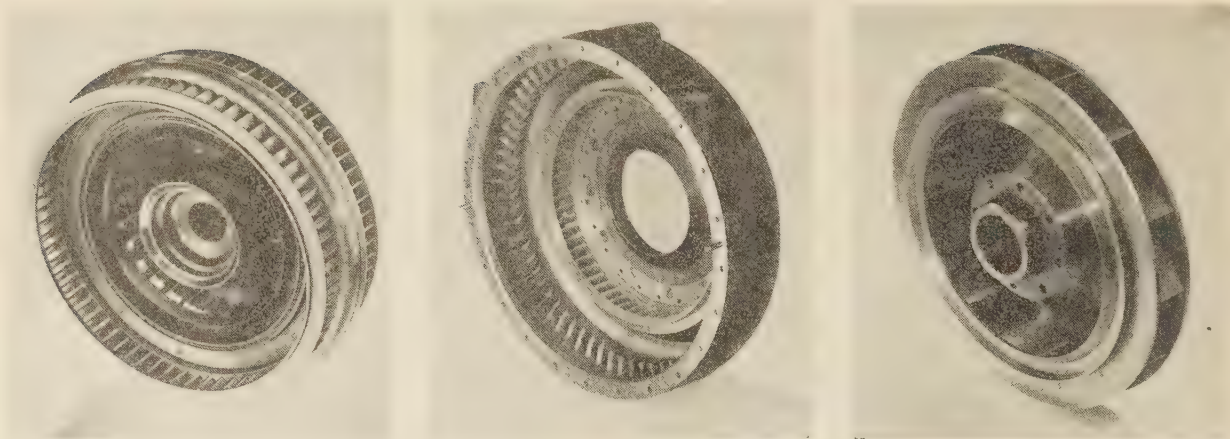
MAJOR COMPONENT PARTS OF MODERN CONVERTER
